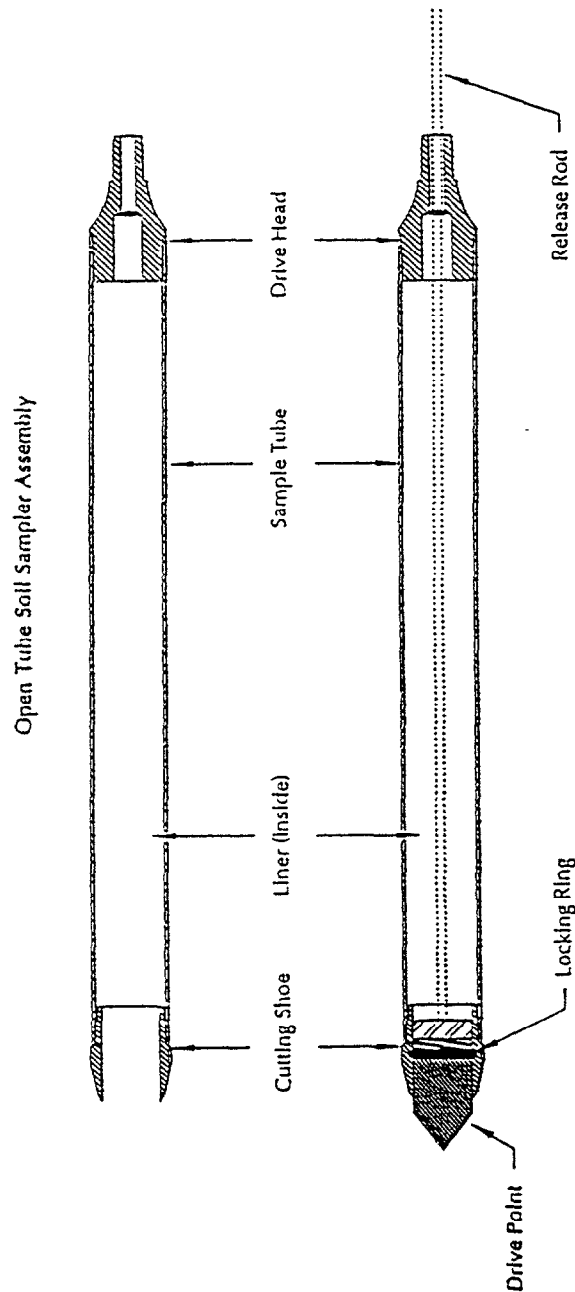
(A) Open and (B) Closed Piston Sampler Assembly, Single Tube System
